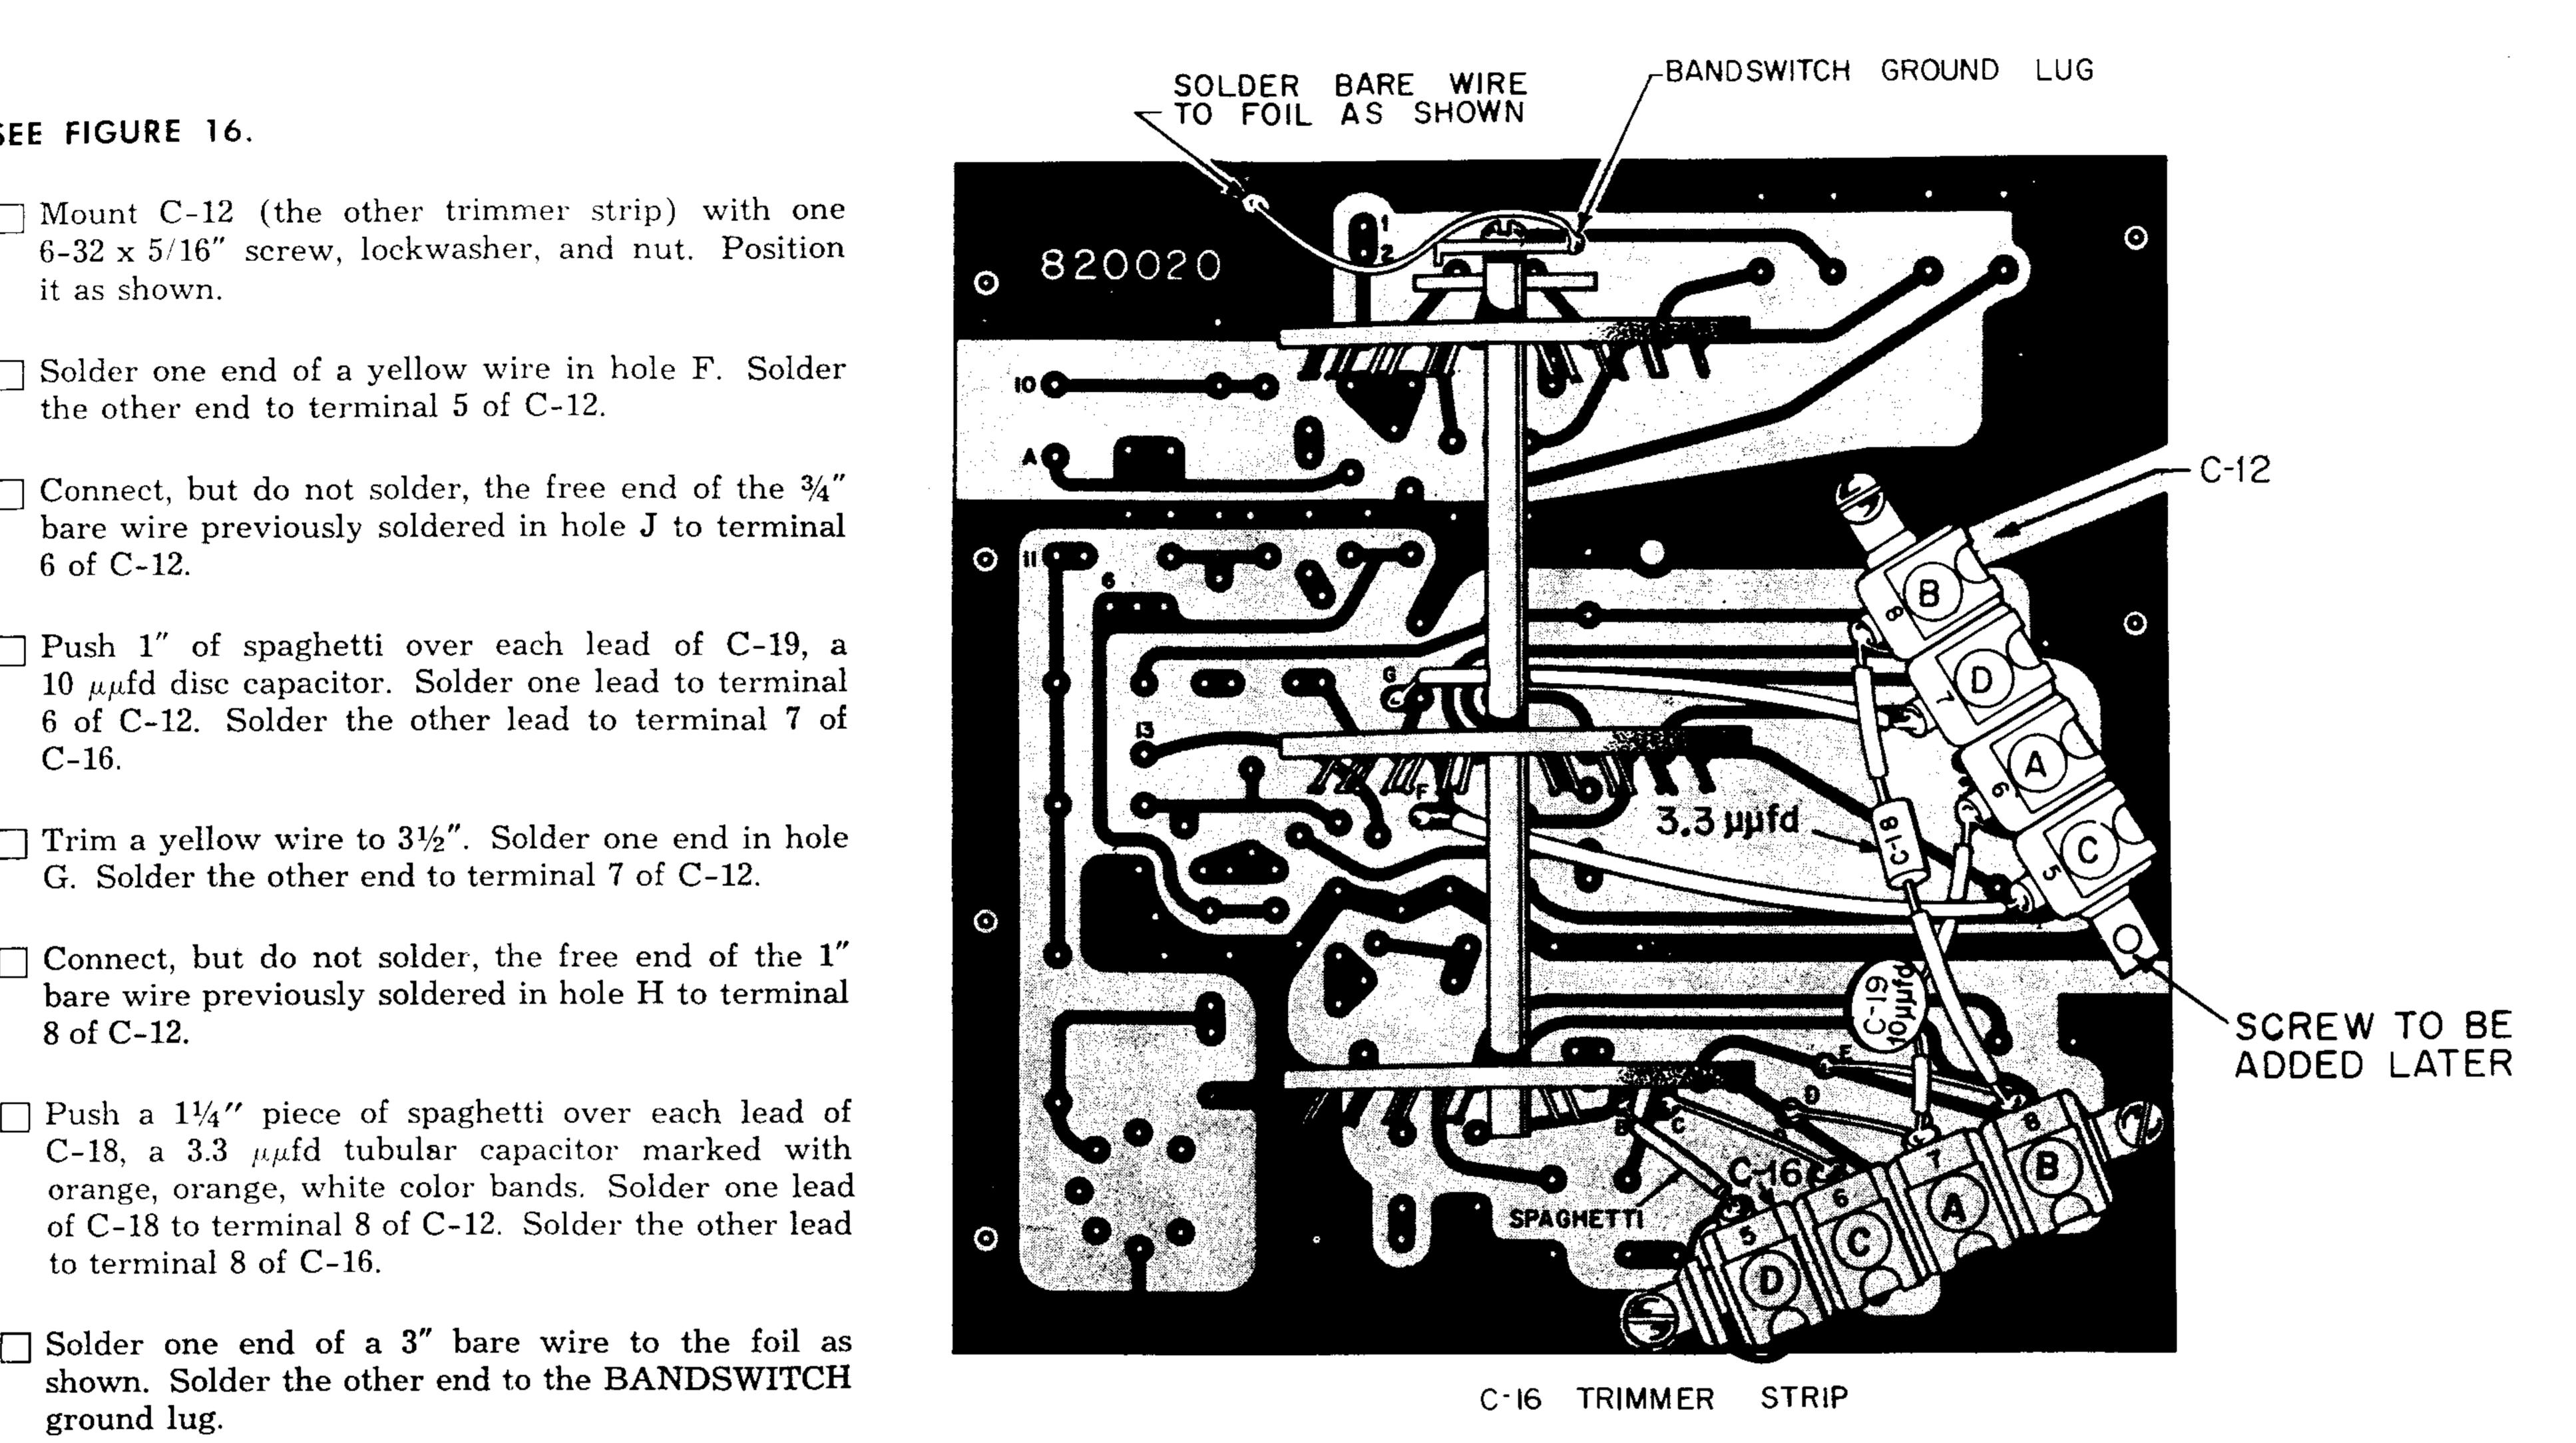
MOUNTING C-12 (TRIMMER STRIP)
